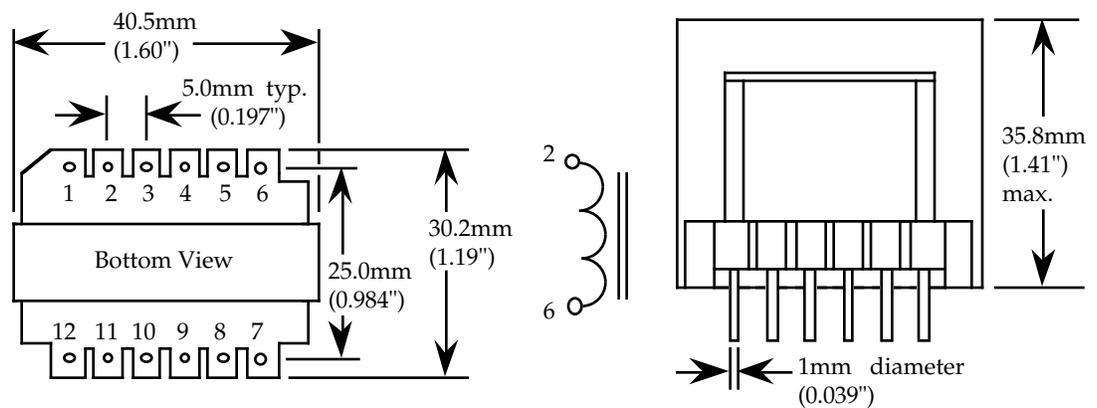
Mechanical Dimensions for Inductor (Recipe "A")
